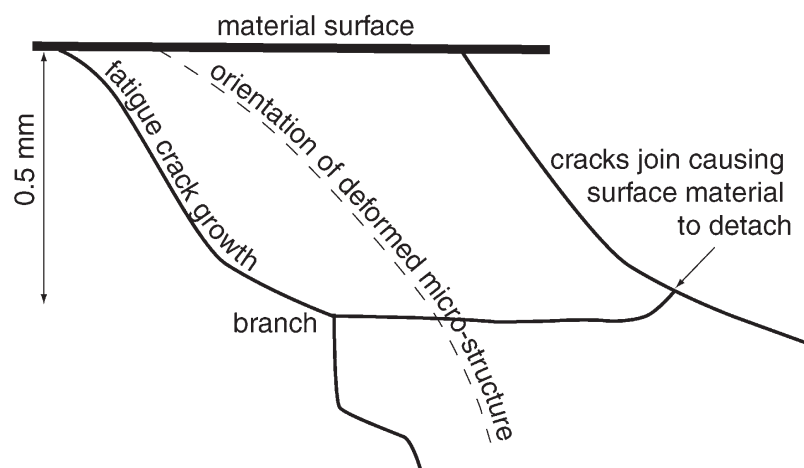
Schematic representation of growth of surface initiated fatigue cracks in wheels, [1].
